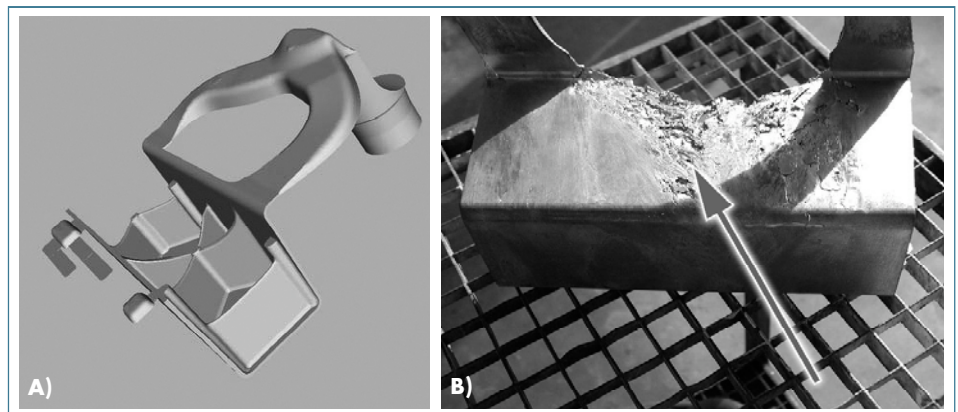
a) The U-shaped CAD geometry (Length: 260 mm, height: 110 mm, width: 70 mm, outer wall thickness: 2.5 mm, rib thickness: 4-6 mm); b) Interrupted filling of the die. The arrow indicates a location where two metal flows meet.
